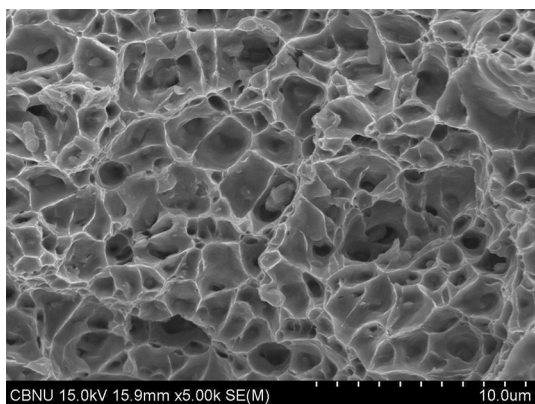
SEM image of fracture surface from the tensile specimen spheroidized in the tube furnace for 1440 min.
